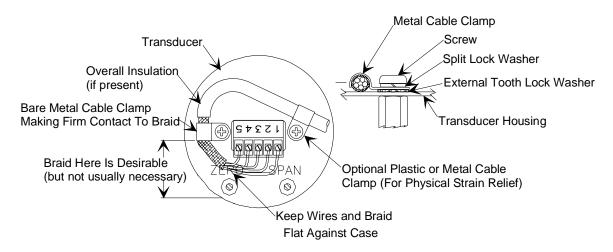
How To Connect the Cable to a Terminal Block (Example 1)
